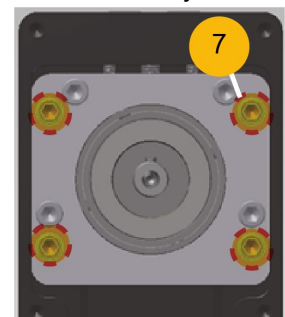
Screws for fixation of drive unit ETH100 & ETH125
